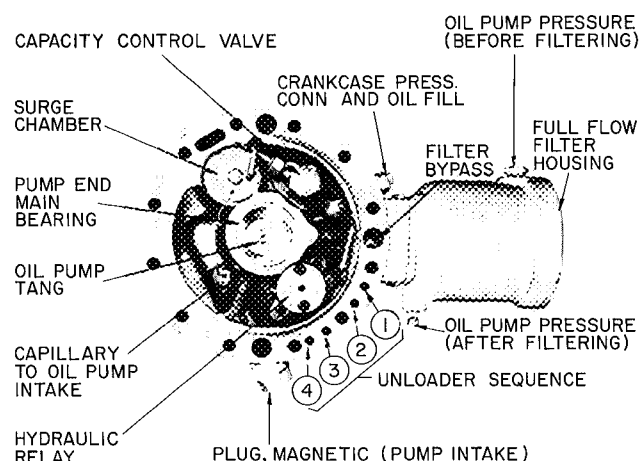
5H120 & 5H126 Pump End Bearing Head
